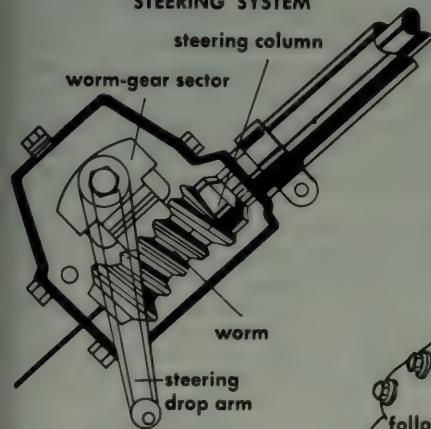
WORM-AND-SECTOR STEERING SYSTEM
